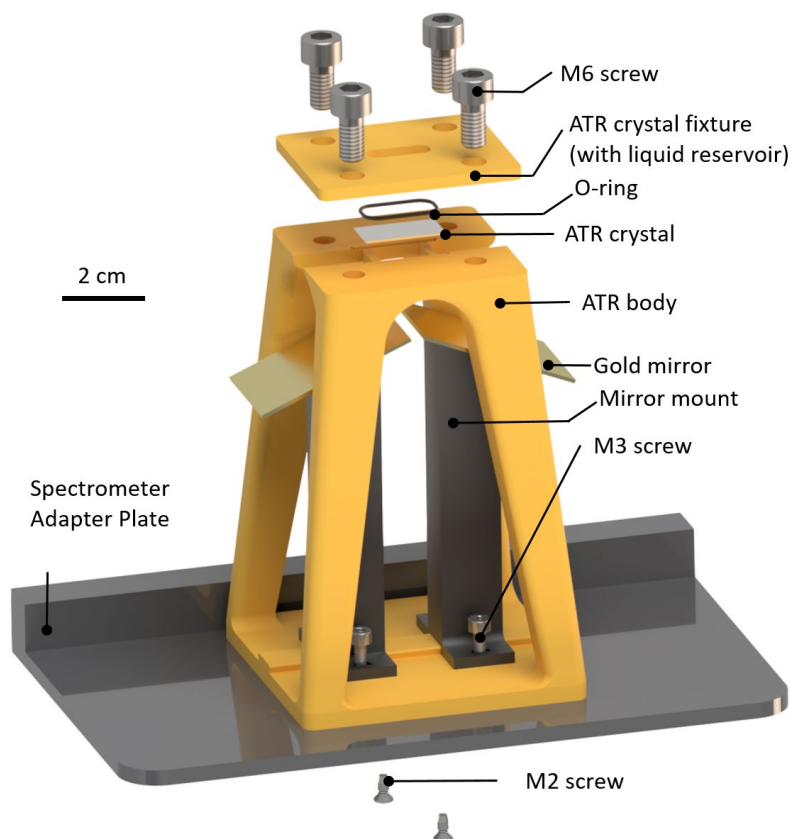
3D-exploded-view drawing of 3D-printed ATR module mounted on the spectrometer adapter plate using custom-built ATR elements.
